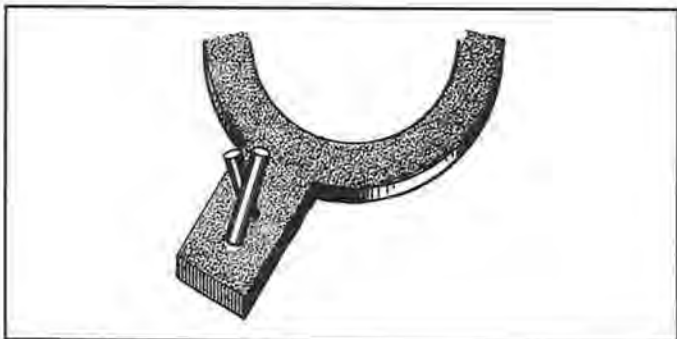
Regulator pins bent as shown may be straightened with the special tweezers.
